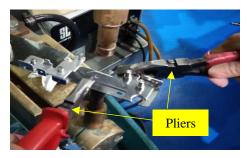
Current method on spotwelding process of Frame R 7160 using a pliers.
